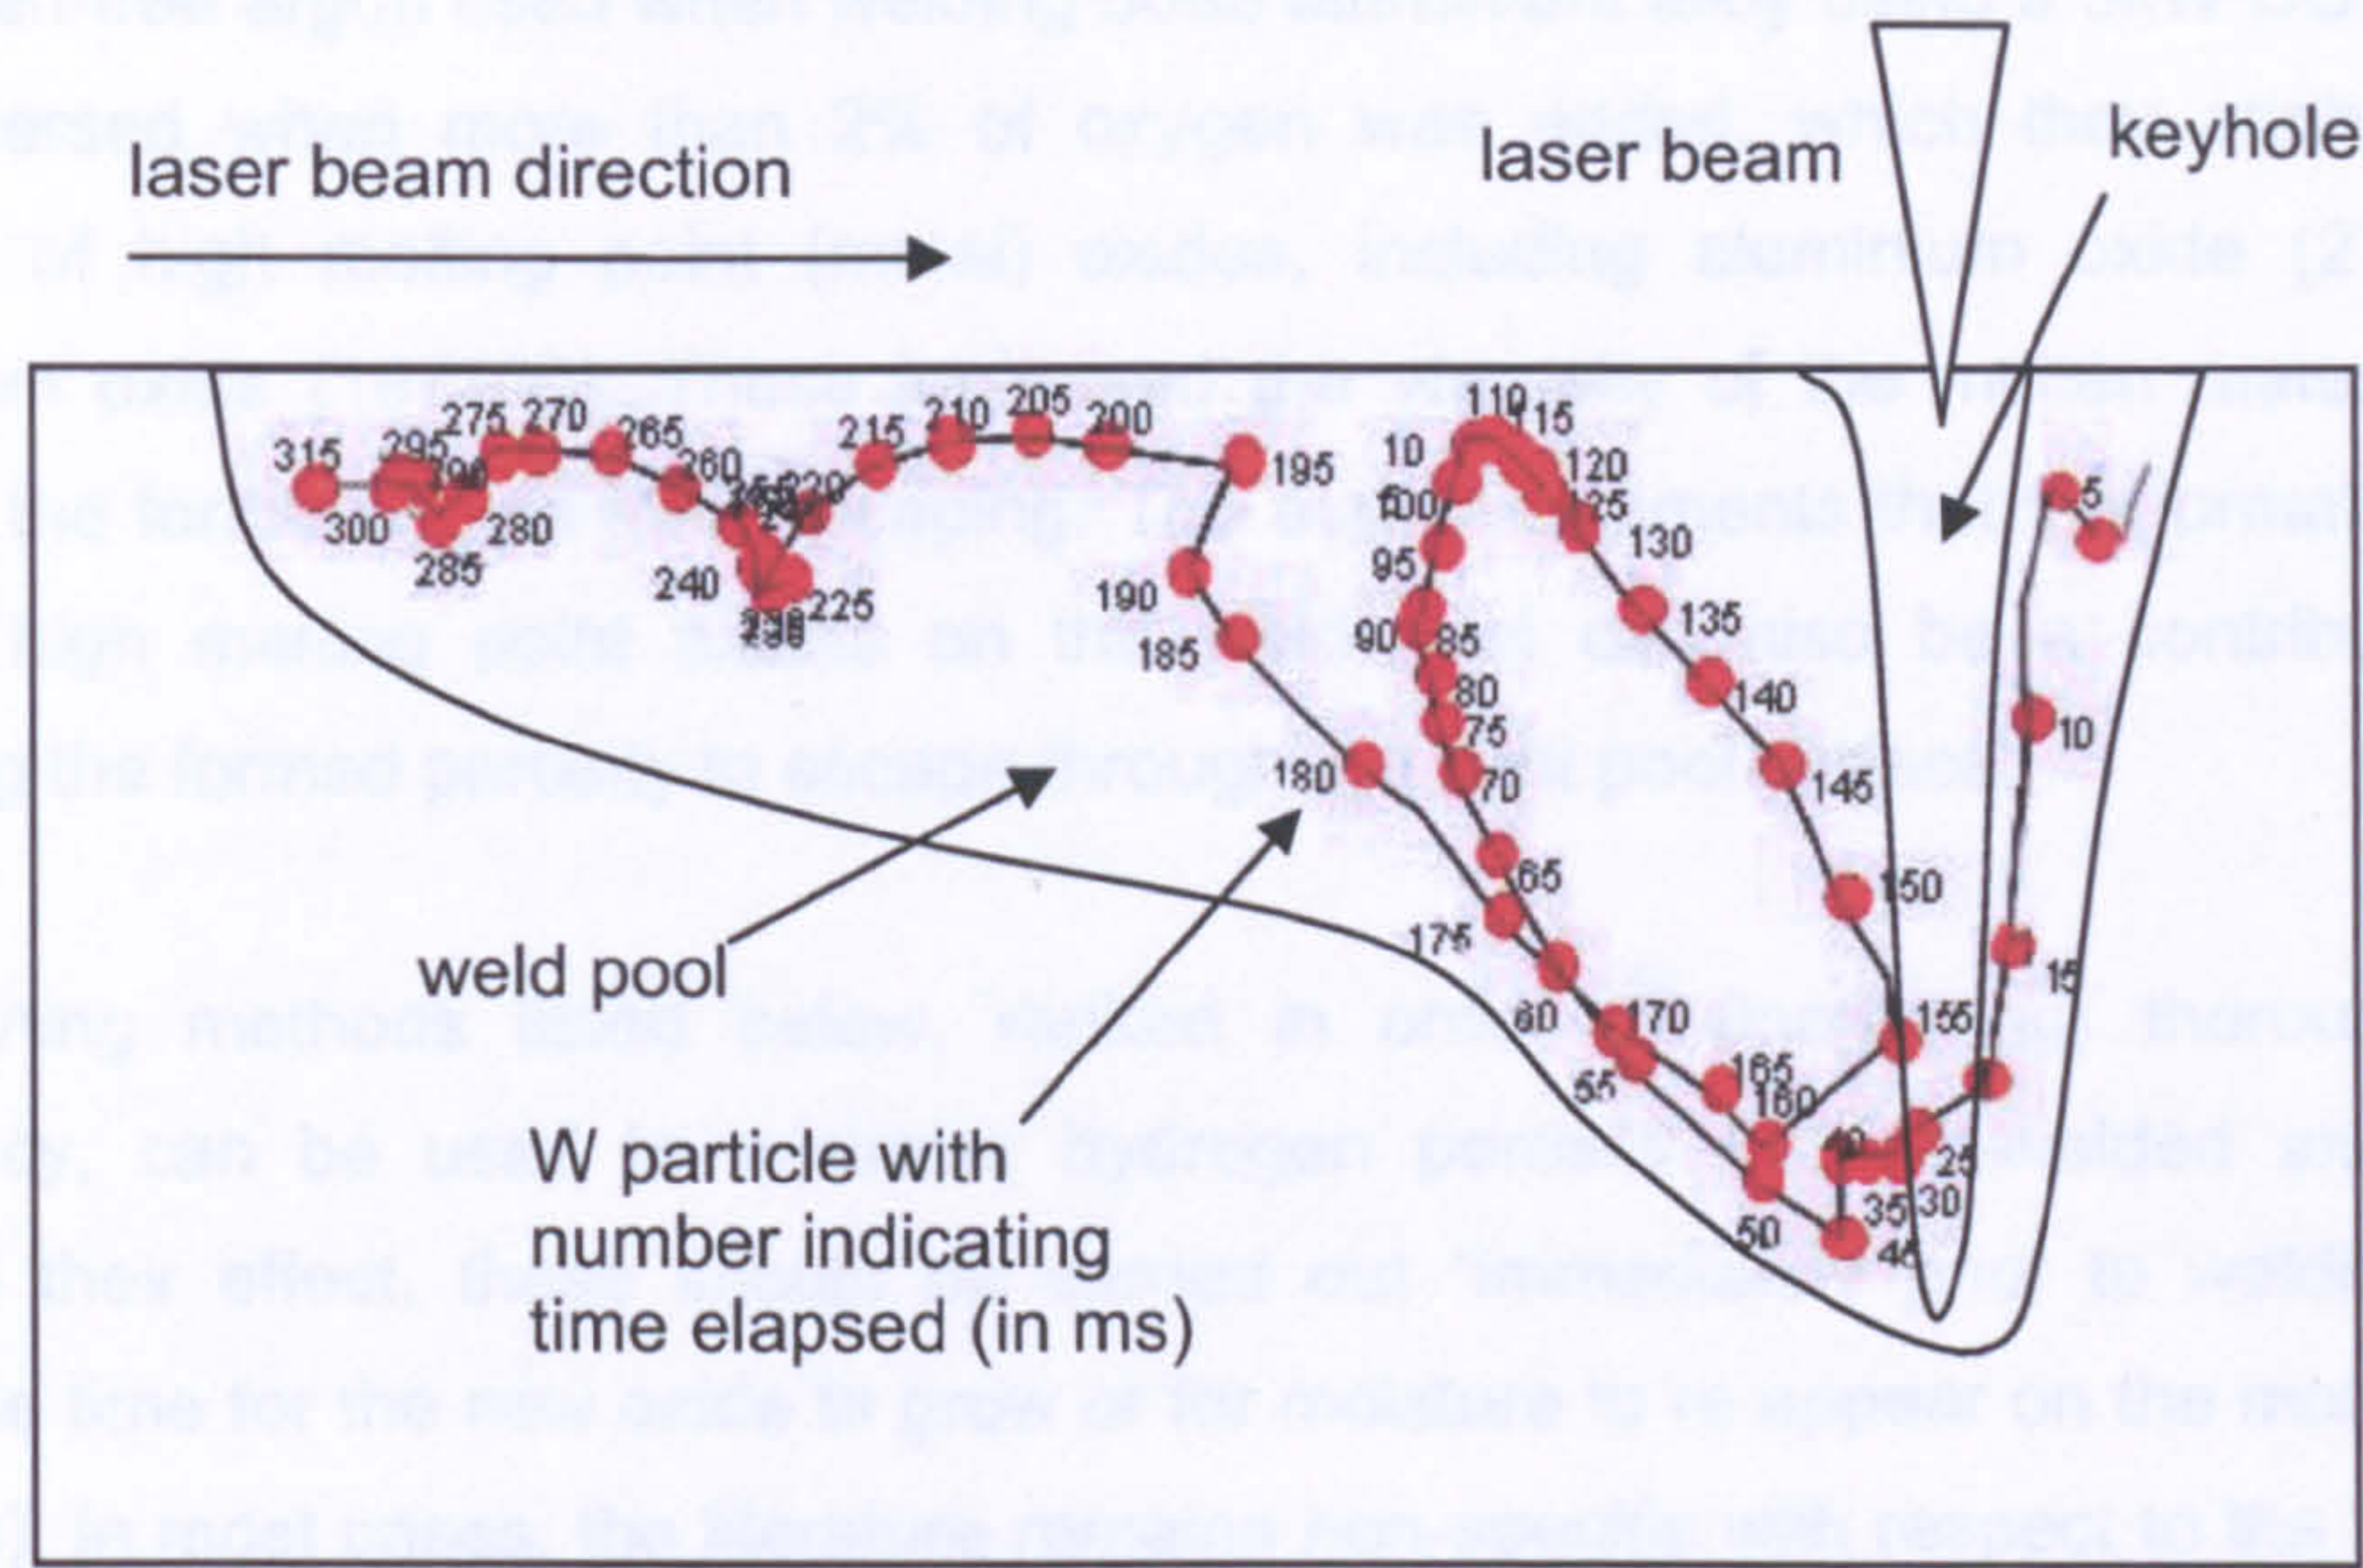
Movement of a pore in an aluminium laser weld visualised by welding over tungsten particles embedded in the sample, and tracked using on-line digital radiography (37)
